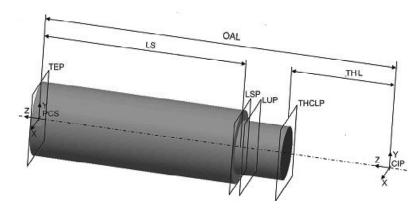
Thread-cutting tap with reinforced shank — Non-cutting part
